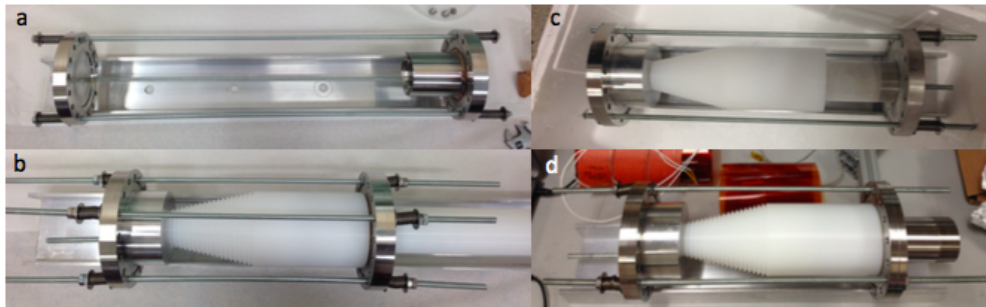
Pictures of using the spring loaded fitting jig for various assembly steps of the first (left) and second (right) HV-FT prototypes: a) empty fitting jig set up for the 1st FT prototype assembly, here one of the flanges available is replaced by the flange-grounding-cylinder welded SS part; b) closed fitting jig with the completely assembled 1st FT prototype; c) warm up of the 2st FT prototype and jig in flowing nitrogen gas after fitting the inner SS compression cylinder of the 2st prototype; d) cool down of the 2st FT prototype in the fitting jig after expansion fitting with the heating jacket to fit the flange-cylinder SS part. Similar to the case of the 1st prototype fitting, one of the flanges of the jig is replaced by the welded flange-cylinder SS part.
